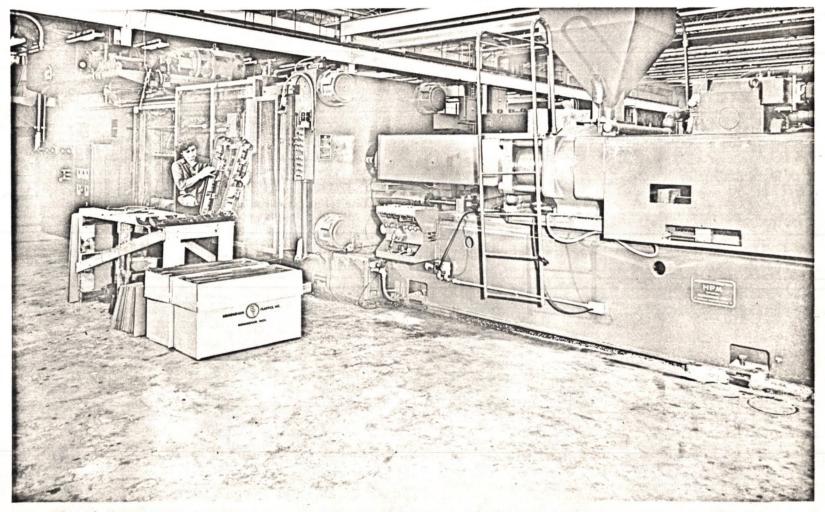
Industrial Model of Automatic Plastic Injection Molding Machine. Courtesy HPM Corp.
